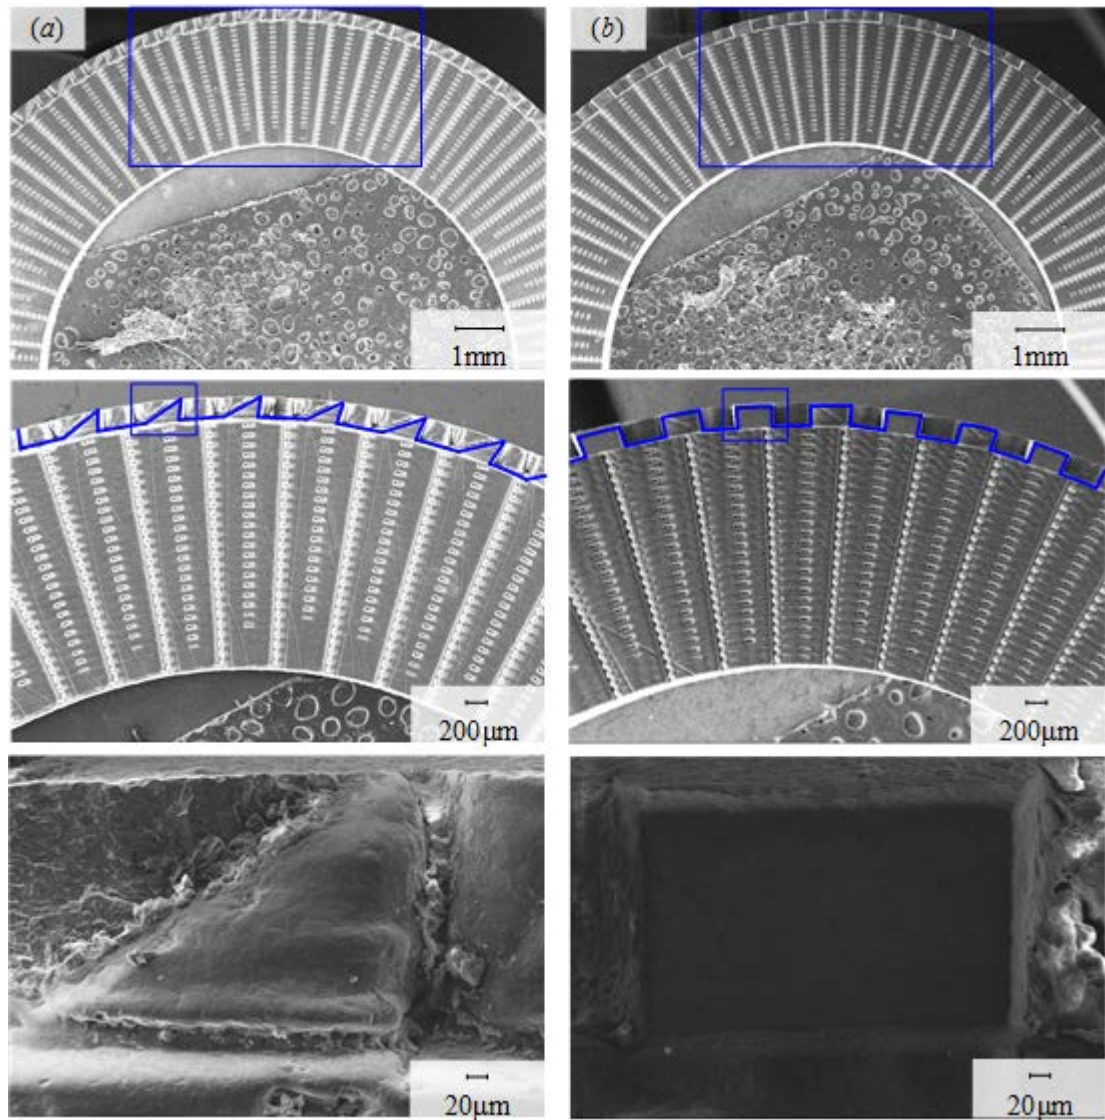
Topography of grinding wheel (a) I, and (b) II
